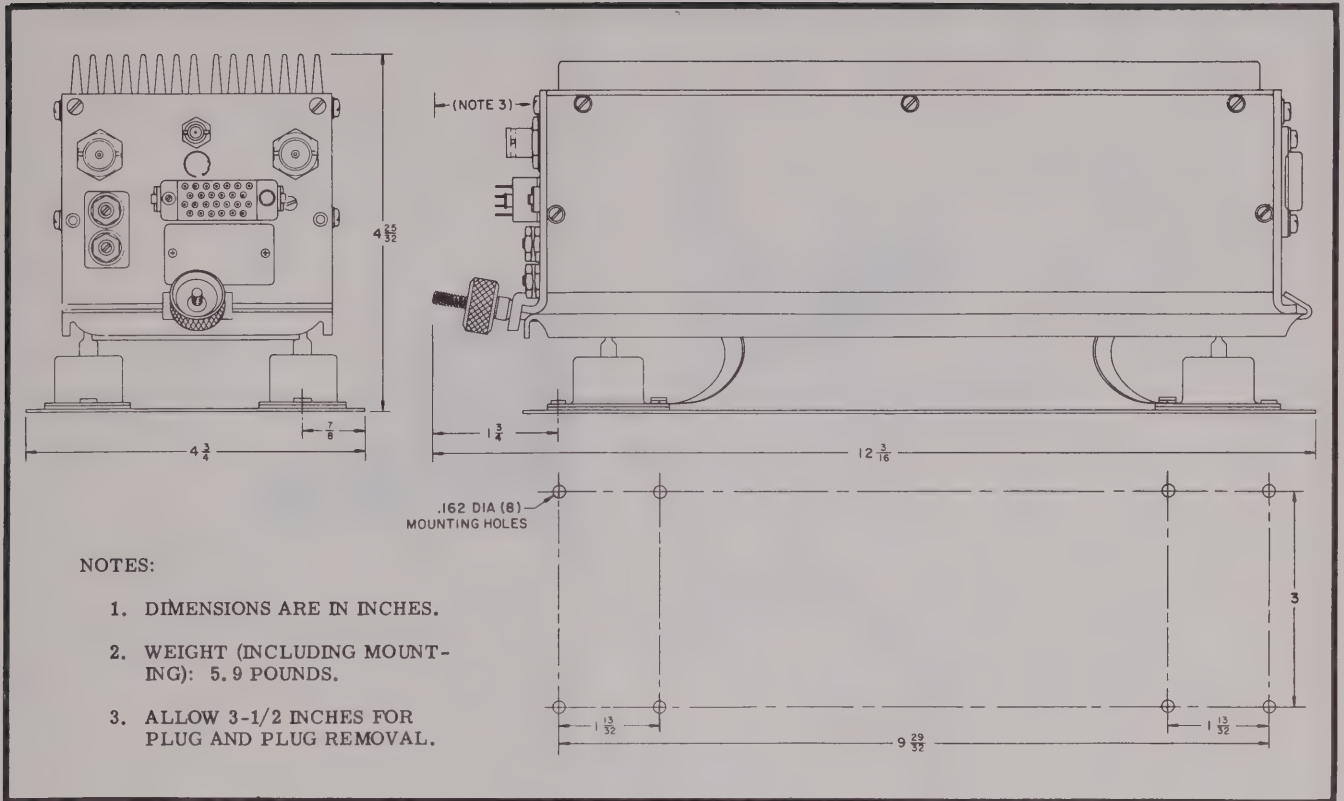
38500 Accessory Unit with Mounting 36320, Installation Dimensions
